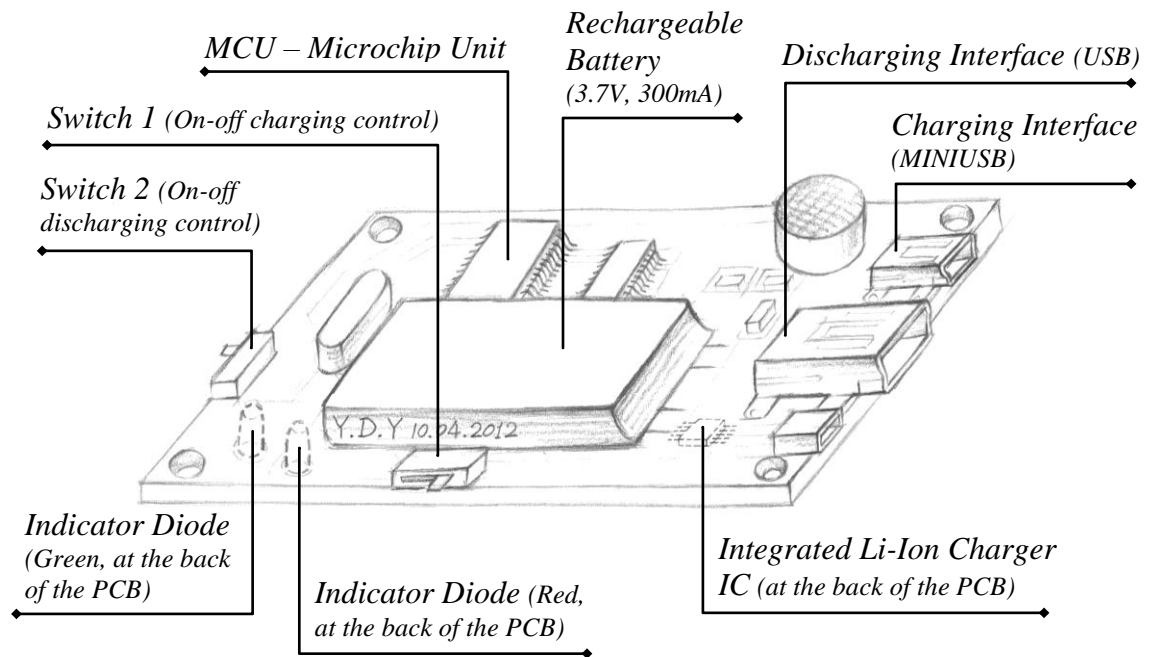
Sketch of the first PCB prototype with the main components for solar charging
